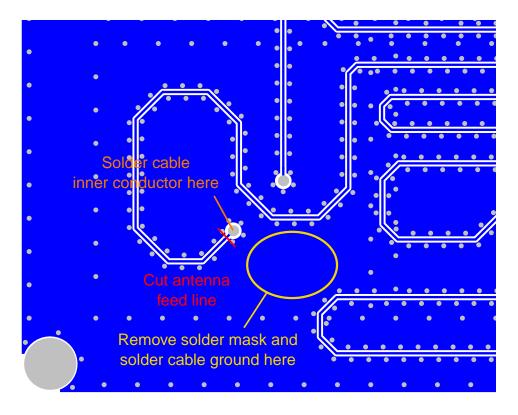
Antenna Impedance Measurement on the Bottom PCB Layer
